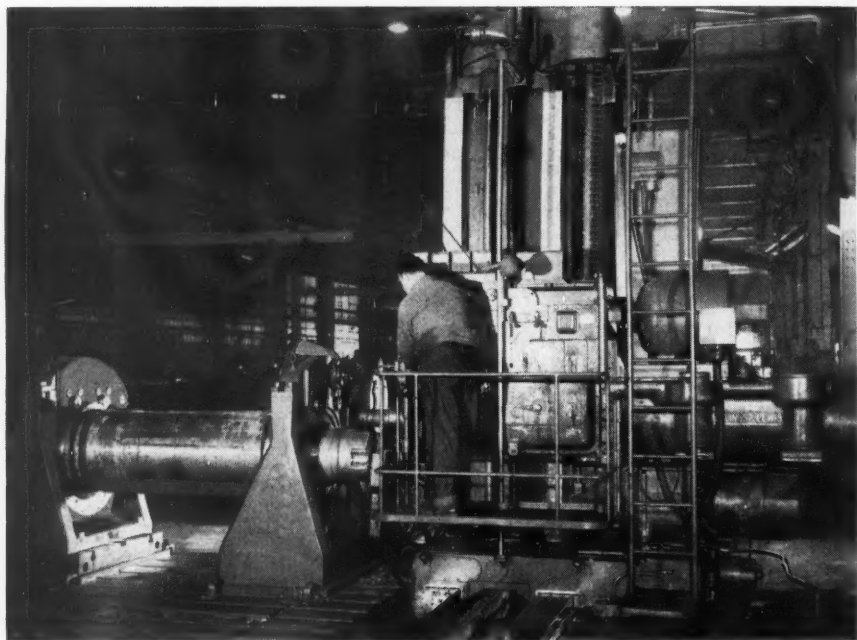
Overall view of complete setup used to machine rolls on floor-type horizontal boring, drilling and milling machine
